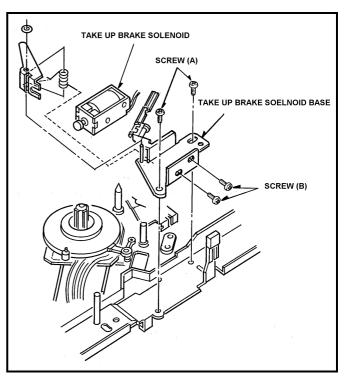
Removal of Take Up Brake Solrnoid
